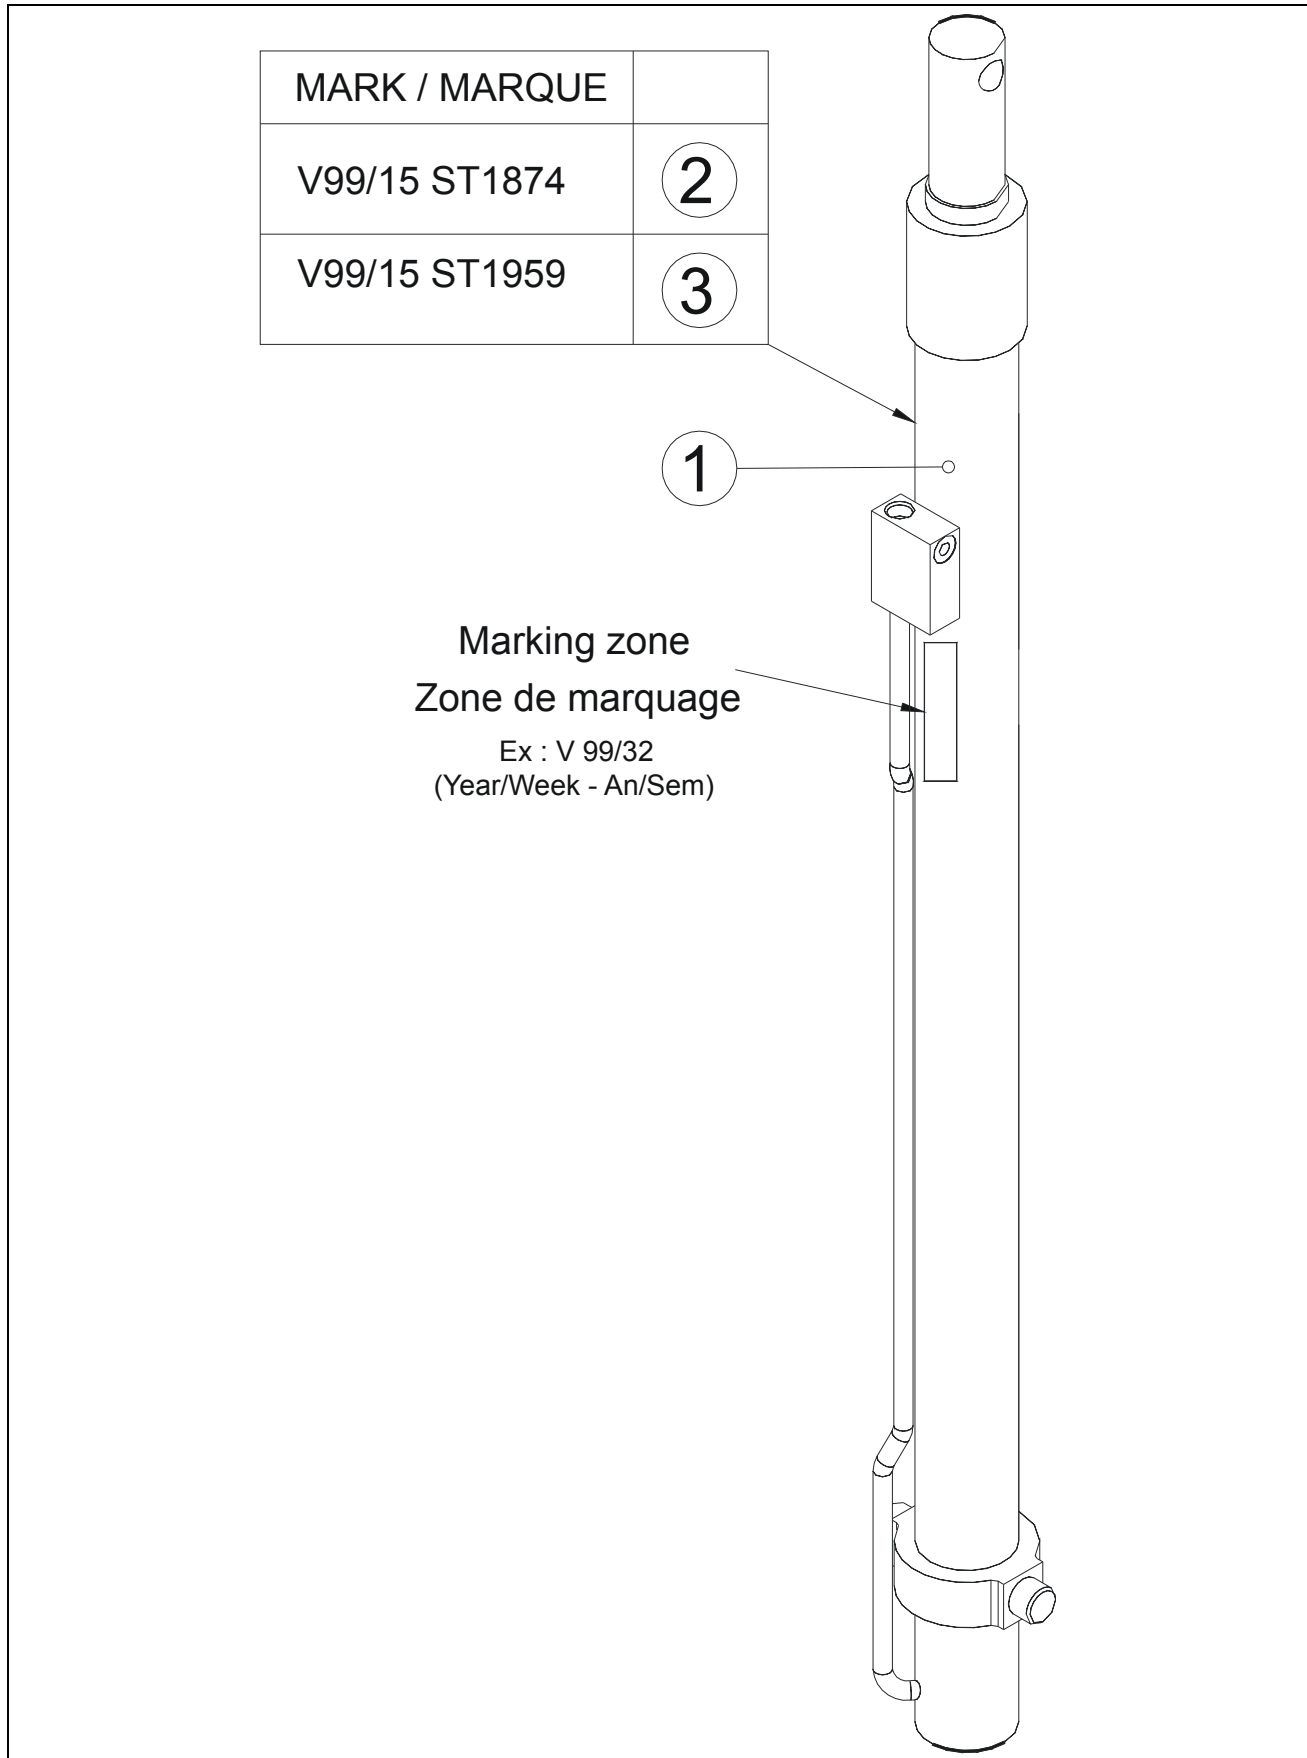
MAST CYLINDER ASSEMBLY / ASSEMBLAGE VERIN DE MAT
